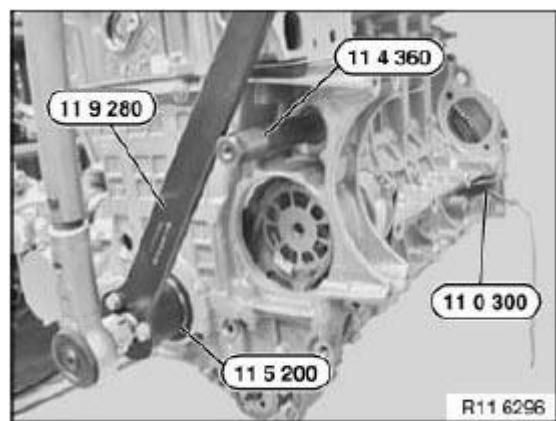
Identifying Special Tool (11 9 280, 11 4 360, 11 5 200 And 11 0 300)
